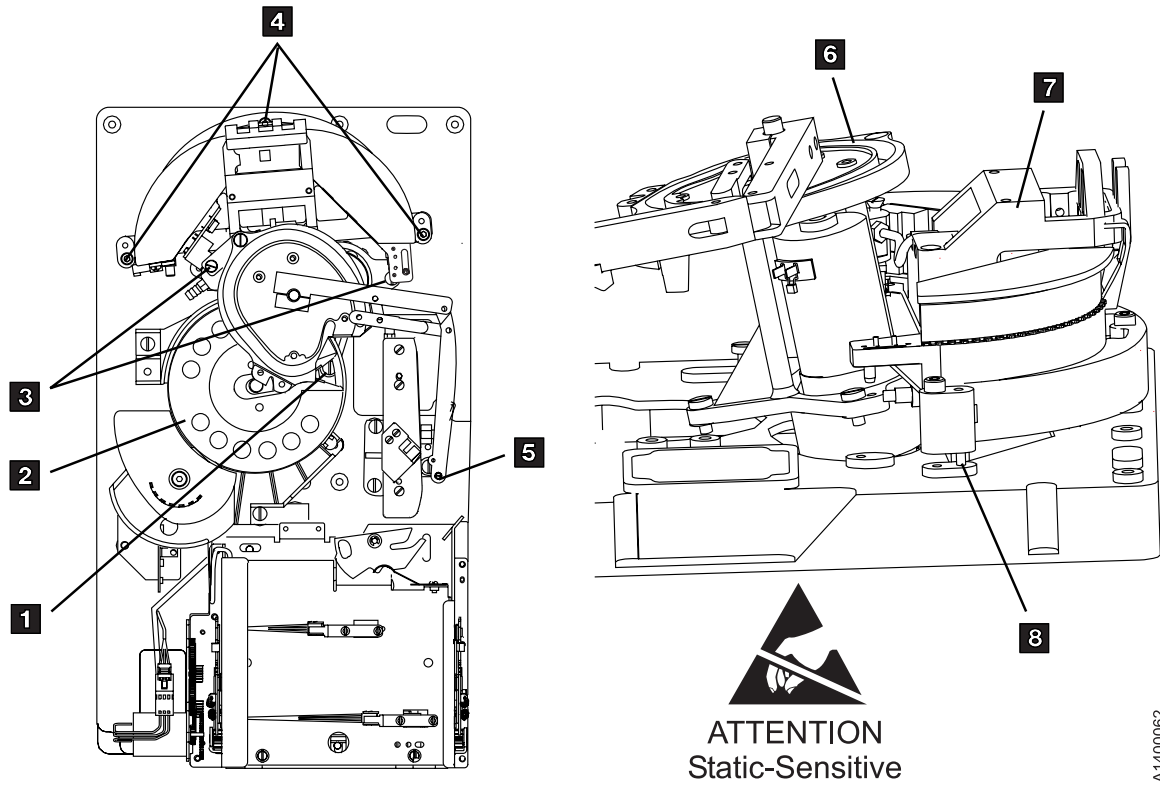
Pantocam Assembly, and Head Guide and Brush Assembly
